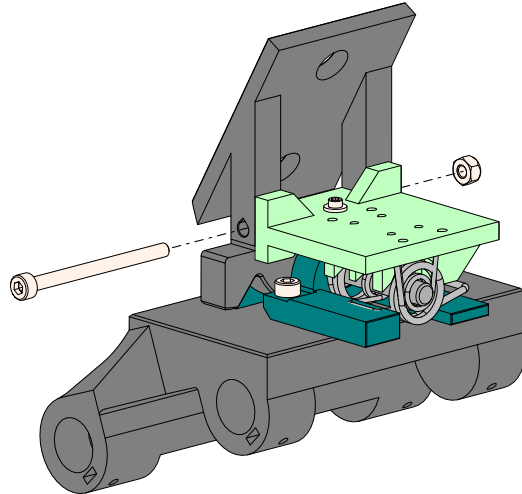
3D view of the re-designed base of the prosthesis with the screw fastening the spring assembly highlighted.
